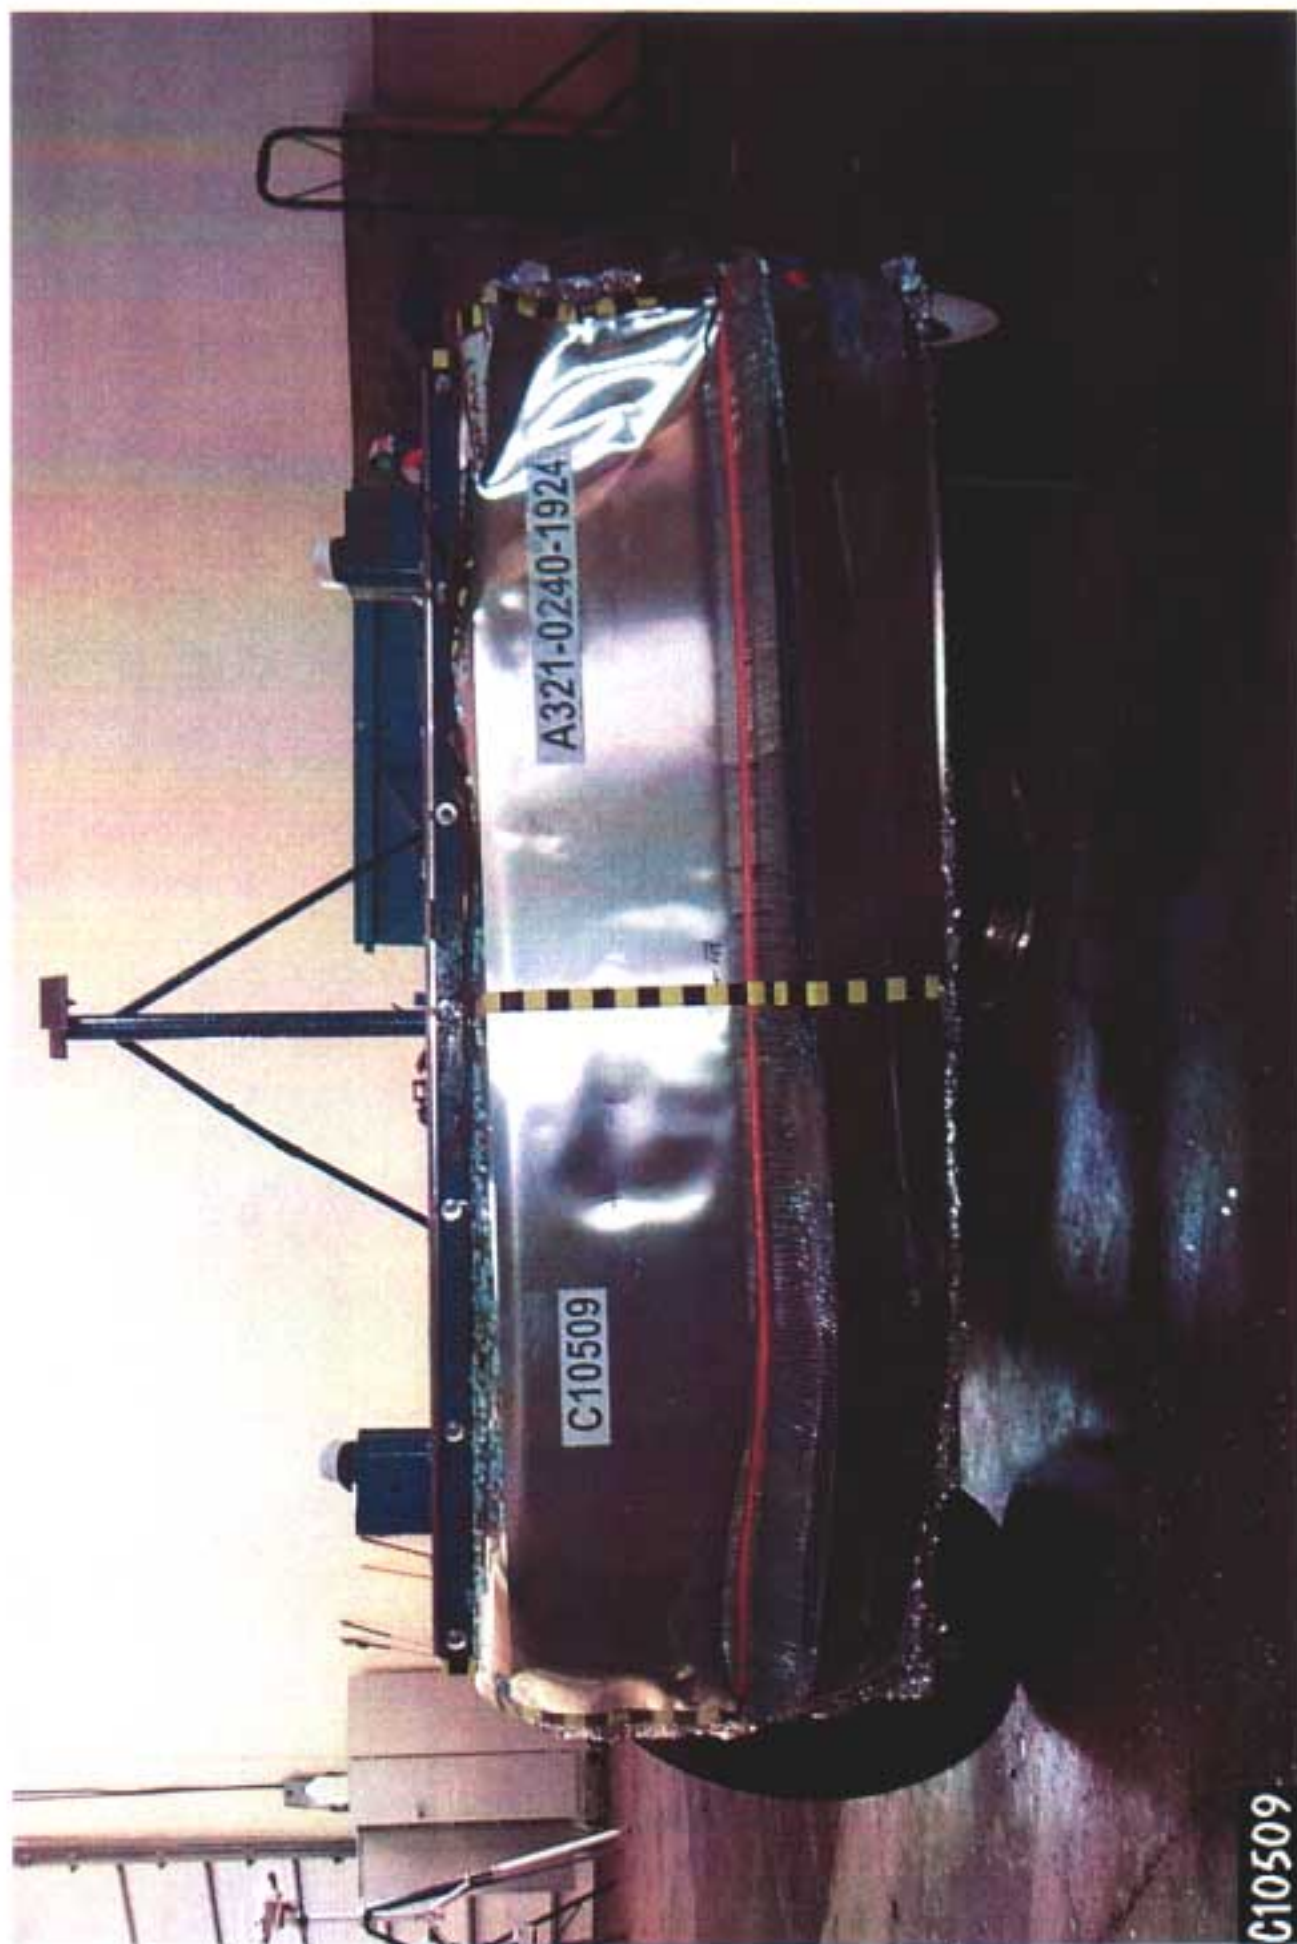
POST-TEST FRONTAL VIEW OF IMPACTOR FACE
